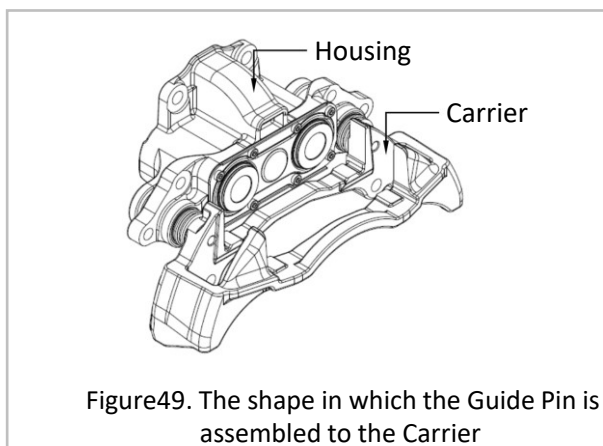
The shape in which the Guide Pin is assembled to the Carrier
